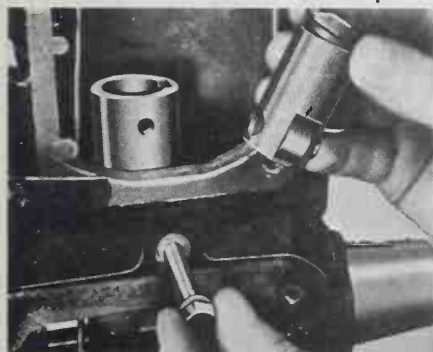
To service camshaft, remove fuel pump(s), fuel pump tappet(s), tappet guide locating pin(s) and guide(s).
